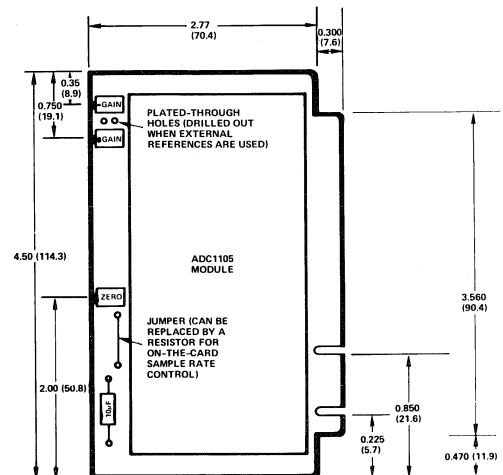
AC1547 Mounting Board Outline Dimensions Dimensions Shown in Inches and (mm)
